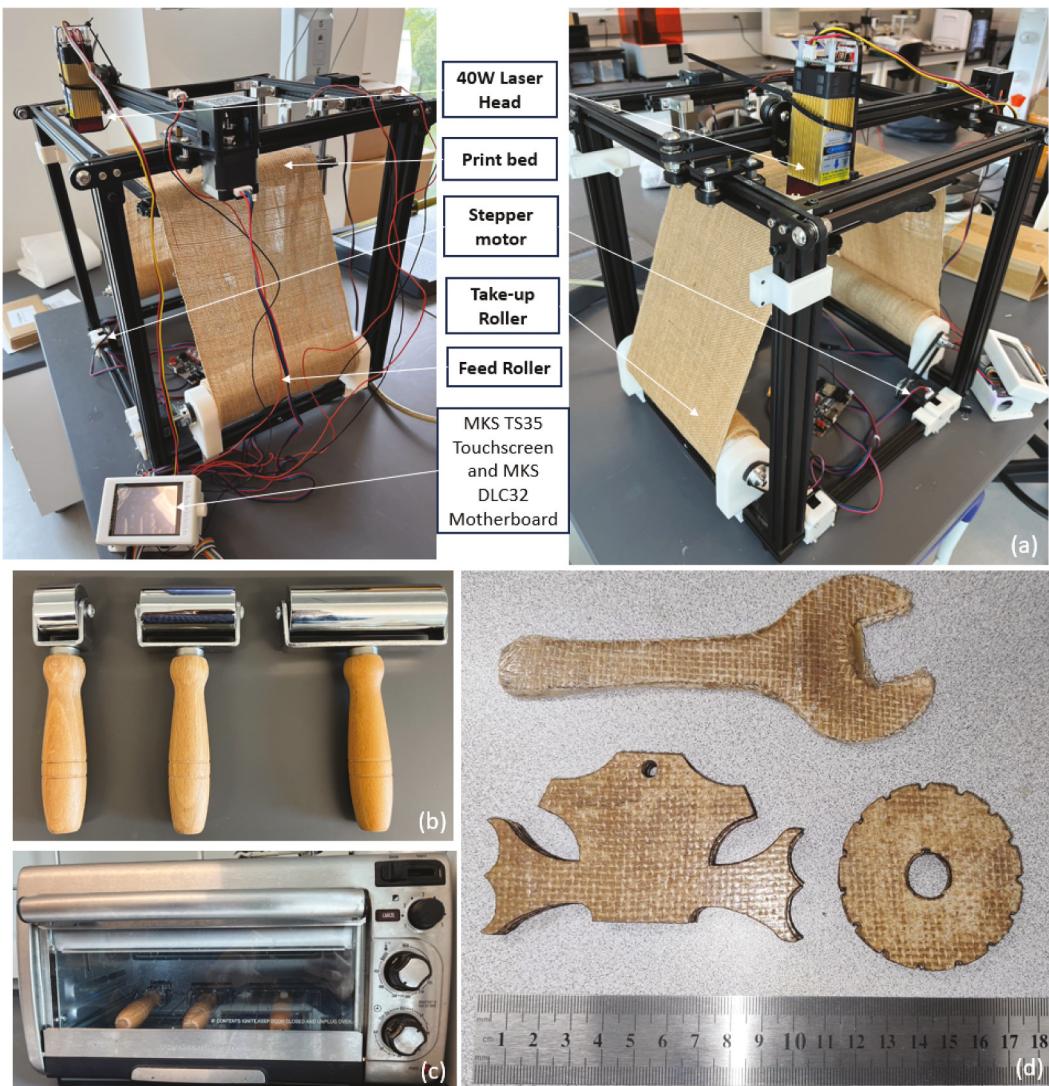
(a) The LOM 3D printer prototype designed and built by the research team, (b) metal rollers used to roll and press on the laser cut layer; (c) metal rollers being pre-heated to 200°C in an oven; (d) demo parts LOM printed by the LOM 3D printer.
